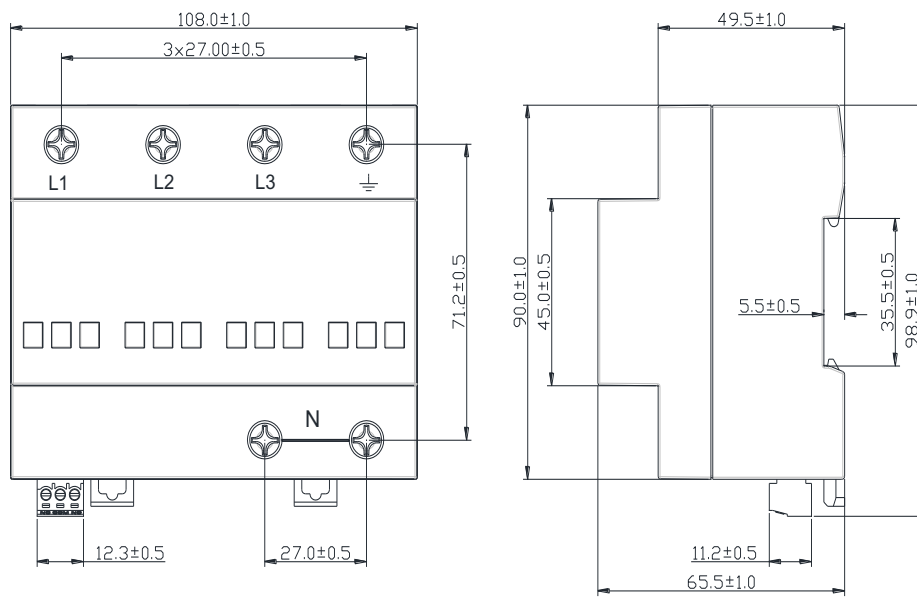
Dimensions of RPM-100/3N+NPG (unit: mm)
